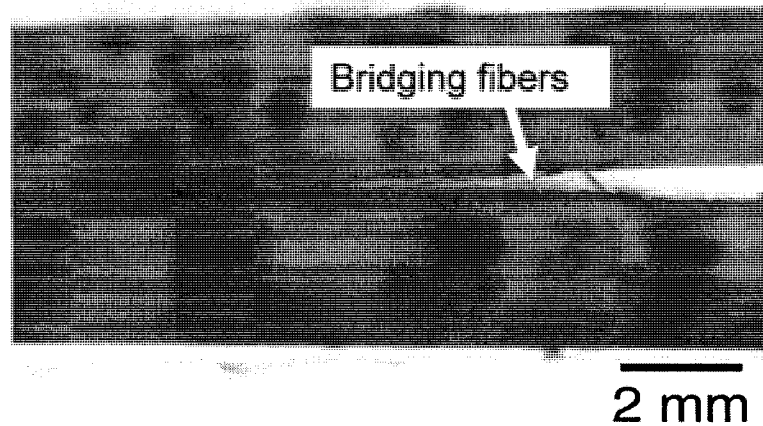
Photograph of a post-tested INF specimen showing bridging fibers between the fracture surfaces.
